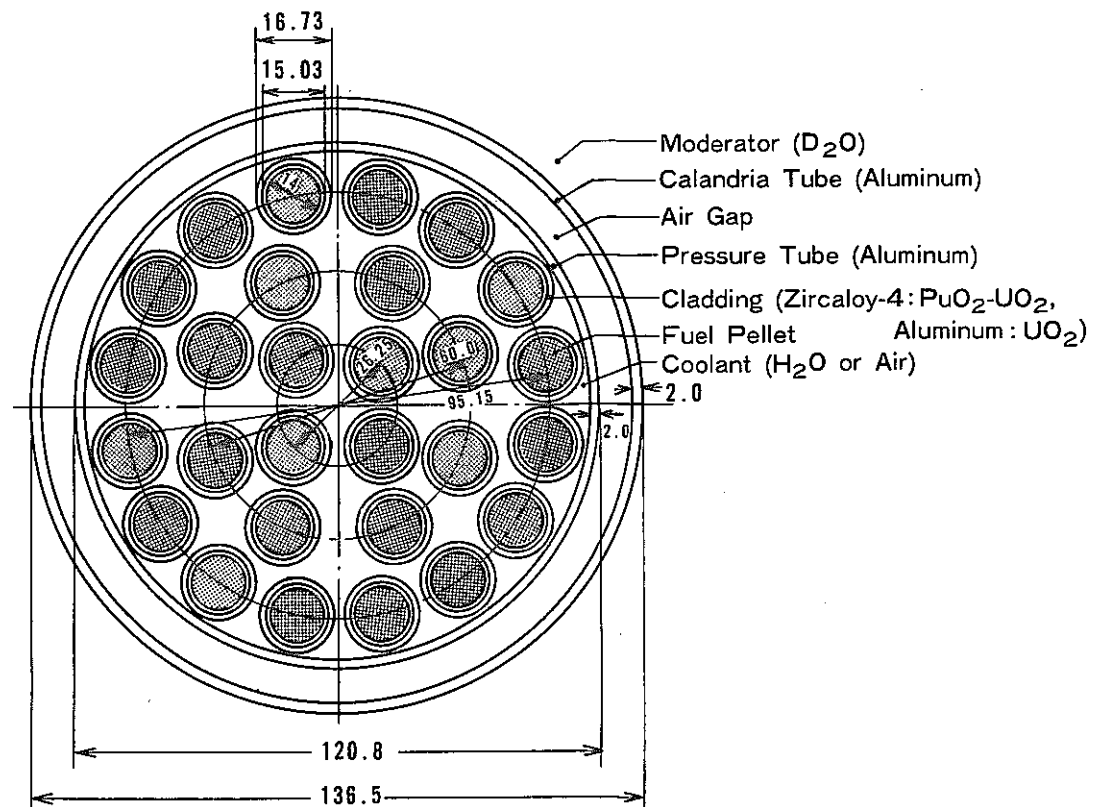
Cross-sectional view of 28-rod fuel assembly.
